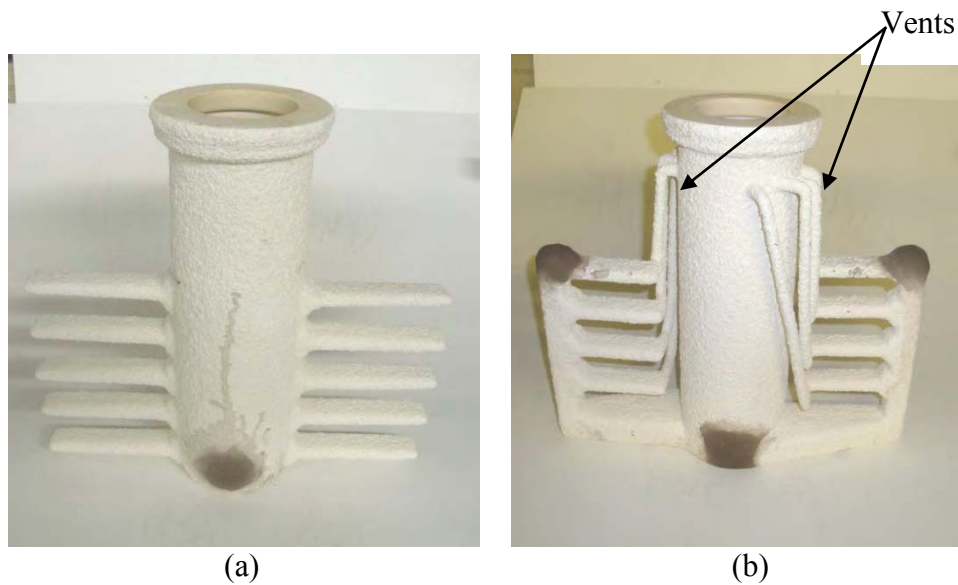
6. Ceramic shell moulds suitable for centrifugal casting of (a) direct and (b) indirect gating mould designs.
